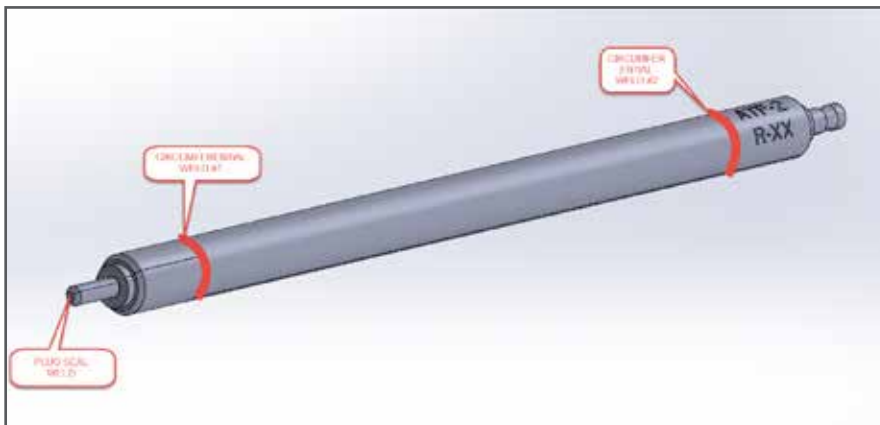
Three welds for basic refabrication capability are shown. Two circumferential welds and a single seal weld completed under pressure.
